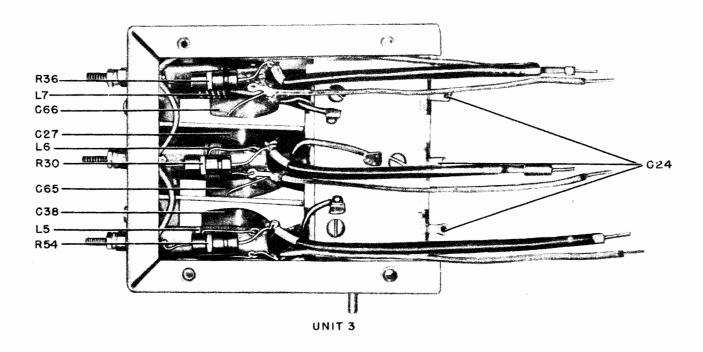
Radio Frequency Oscillator O-165/UR, Multiplier Tuning Assembly, Left Side
